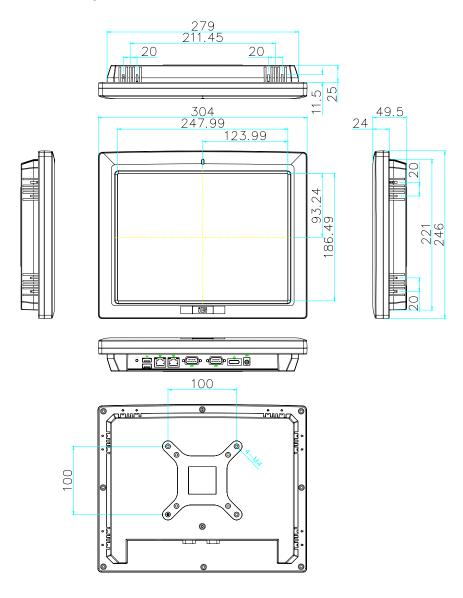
AFL-12A-N270 Top and Bottom Panel Dimensions (mm)
